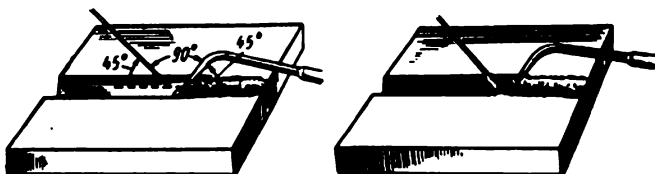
Position of filler metal and brazing torch with respect to the edges of the joint during braze welding
